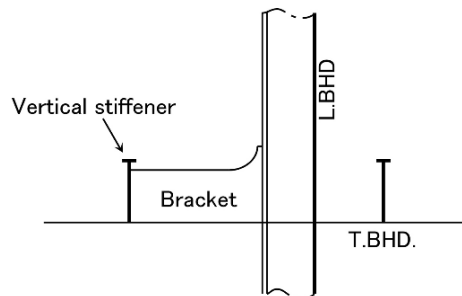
Bracket connection between longitudinal and vertical stiffener
